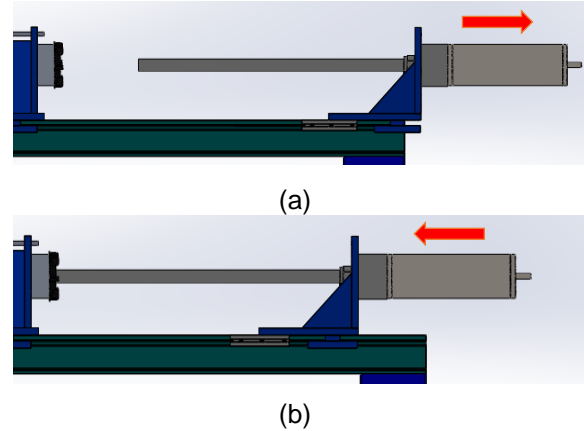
Pneumatic gun assembly: (a) Projectile exchange position; (b) Firing position.
